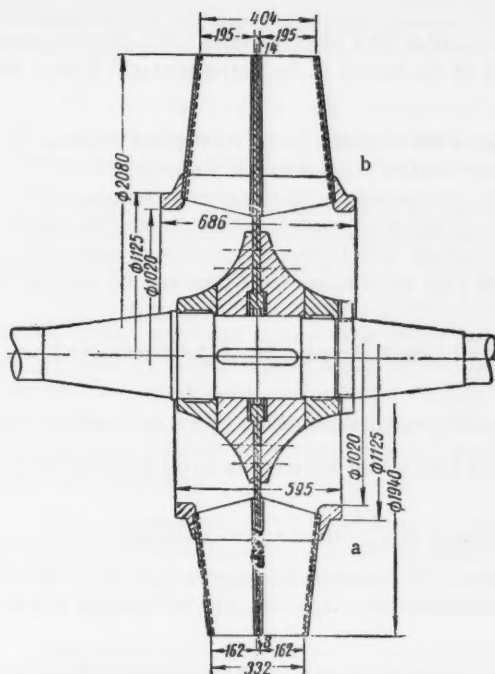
Redesigning of extractor rotor: a) before redesigning; b) after redesigning.
